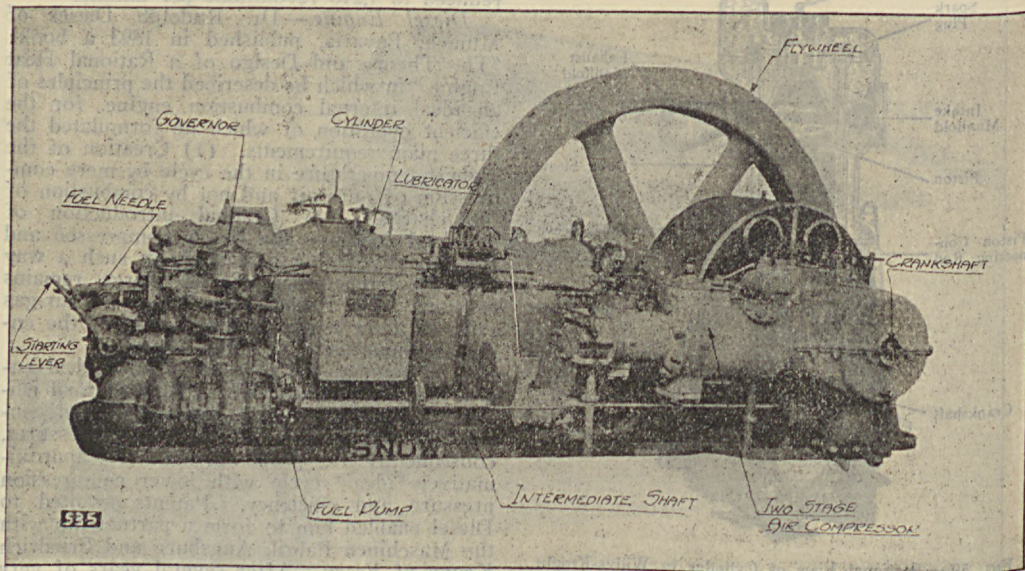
170 H.P. Two-Cycle Diesel Engine, One Cylinder, Horizontal Type.
